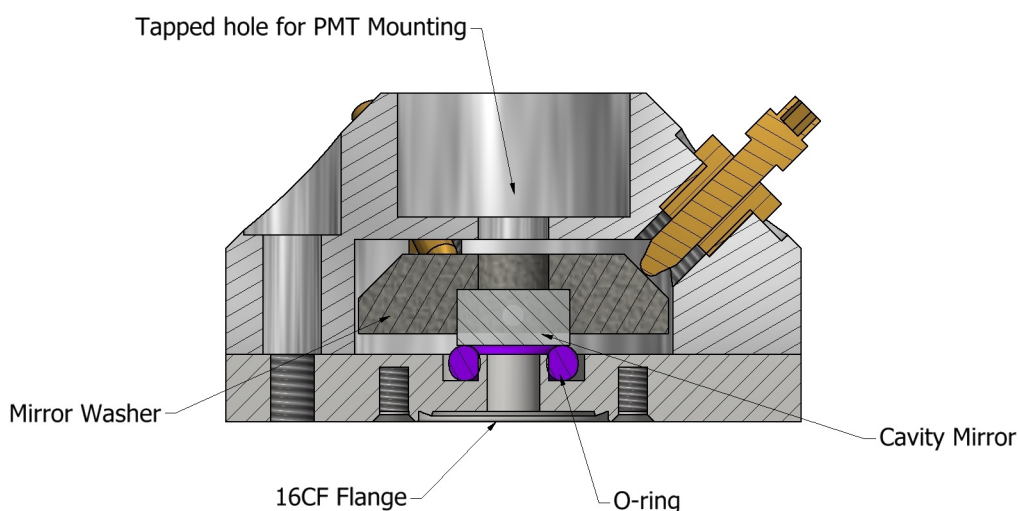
Schematic cross-section of cavity mirror mount. This assembly can be directly mounted onto a 16 CF flange and the mirrors aligned with the precision screws. There are three precision screws arranged 120° from each other. As they are tightened the screws will push on the mirror washer and adjust the angle of the mirror. The mirror washer serves to protect the mirror and precision screws from damage by over-tight contact and allows for space to mount the PMT directly into the mount.
